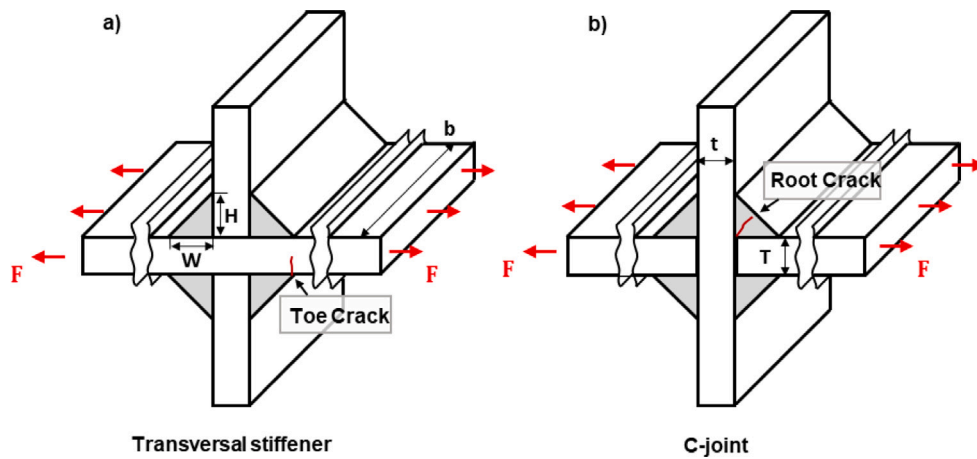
Sketch with geometric parameters (a) transversal stiffener with toe failure (b) C-joint with root failure.
